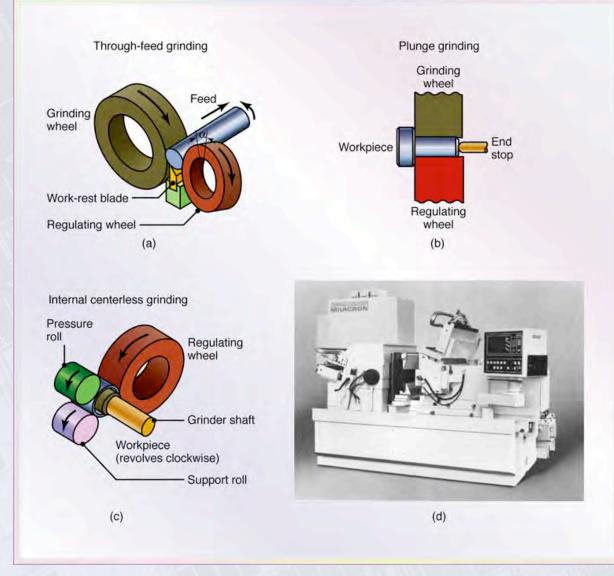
Schematic illustration of centerless grinding operations: (a) through-feed grinding, (b) plunge grinding, (c) internal grinding, and (d) a computer numerical-control cylindrical-grinding machine. *Source:* Courtesy of Cincinnati Milacron, Inc.
